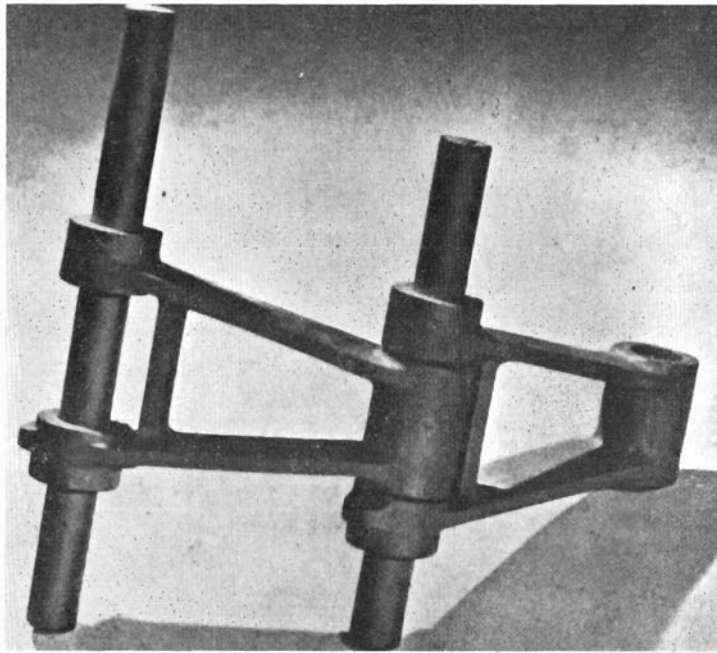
Heat-resisting steel links produced by casting in a shell mould (Osborn et al.¹⁰).
